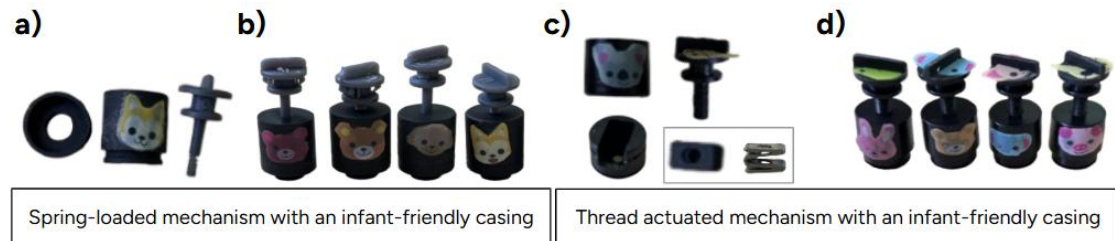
3D printed mechanisms. (a) Components of the spring-loaded mechanism: bottom part, casing and the failed screw-spring unit. (b) Same spring-loaded mechanism assembled in its intended configuration. (c) Components of the thread actuated mechanism: a bottom part, lateral and frontal view of the new flat spring (note the change from a coil to a flat shape compared with a), a smaller casing and a redesigned screw. (d) Threaded actuated mechanism fully assembled.
